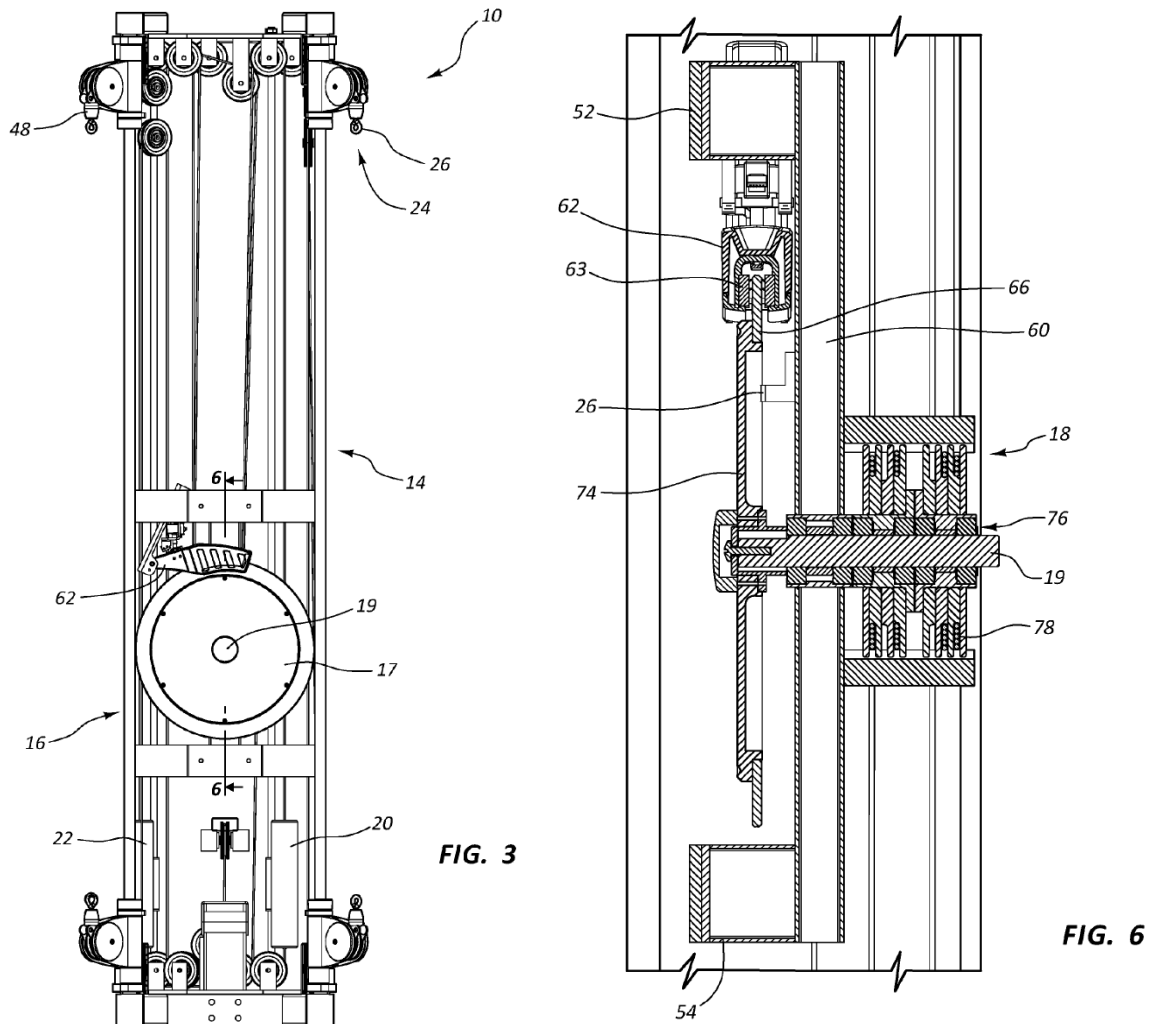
illustrates a front view of cable exercise machine 10 with its outside cover removed. *Id.* at 4:28–29, 6:19–22. Figure 6 is a cross sectional view of the resistance mechanism of cable exercise machine 10. *Id.* at 8:31–32.
